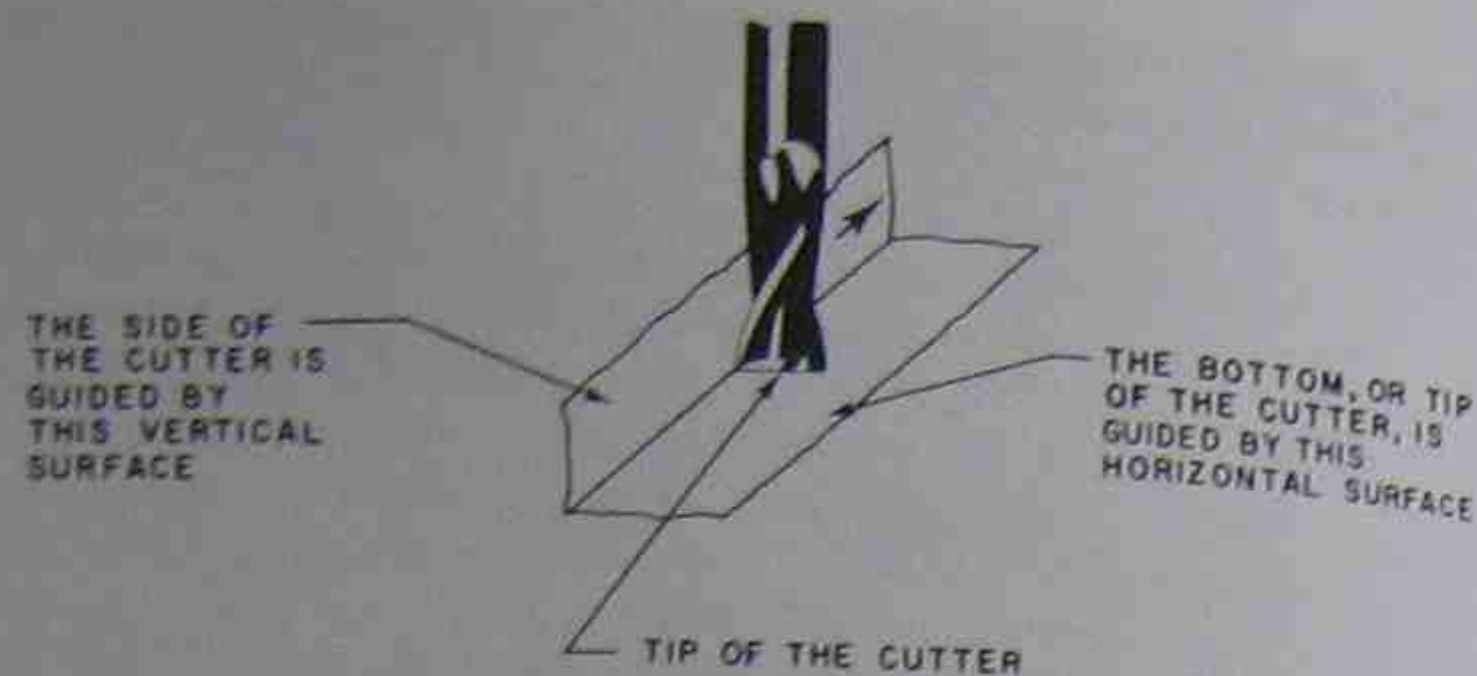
The cutter is guided by two surfaces or planes. These may be imaginary surfaces, constructed by the part programmer to guide the cutting tool in space, or they may be the actual surfaces of the part.
